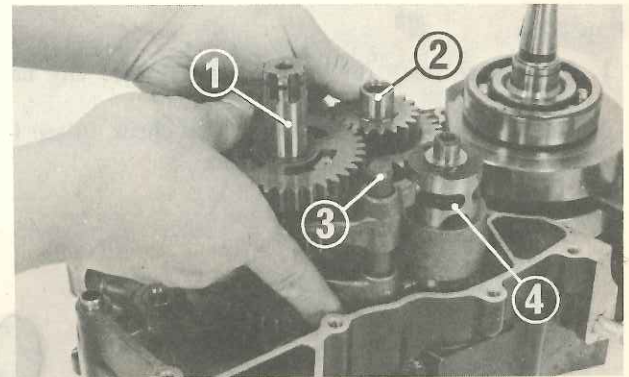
(1) Main shaft (2) Countershaft gears (3) Shift fork shaft (4) Shift drum
